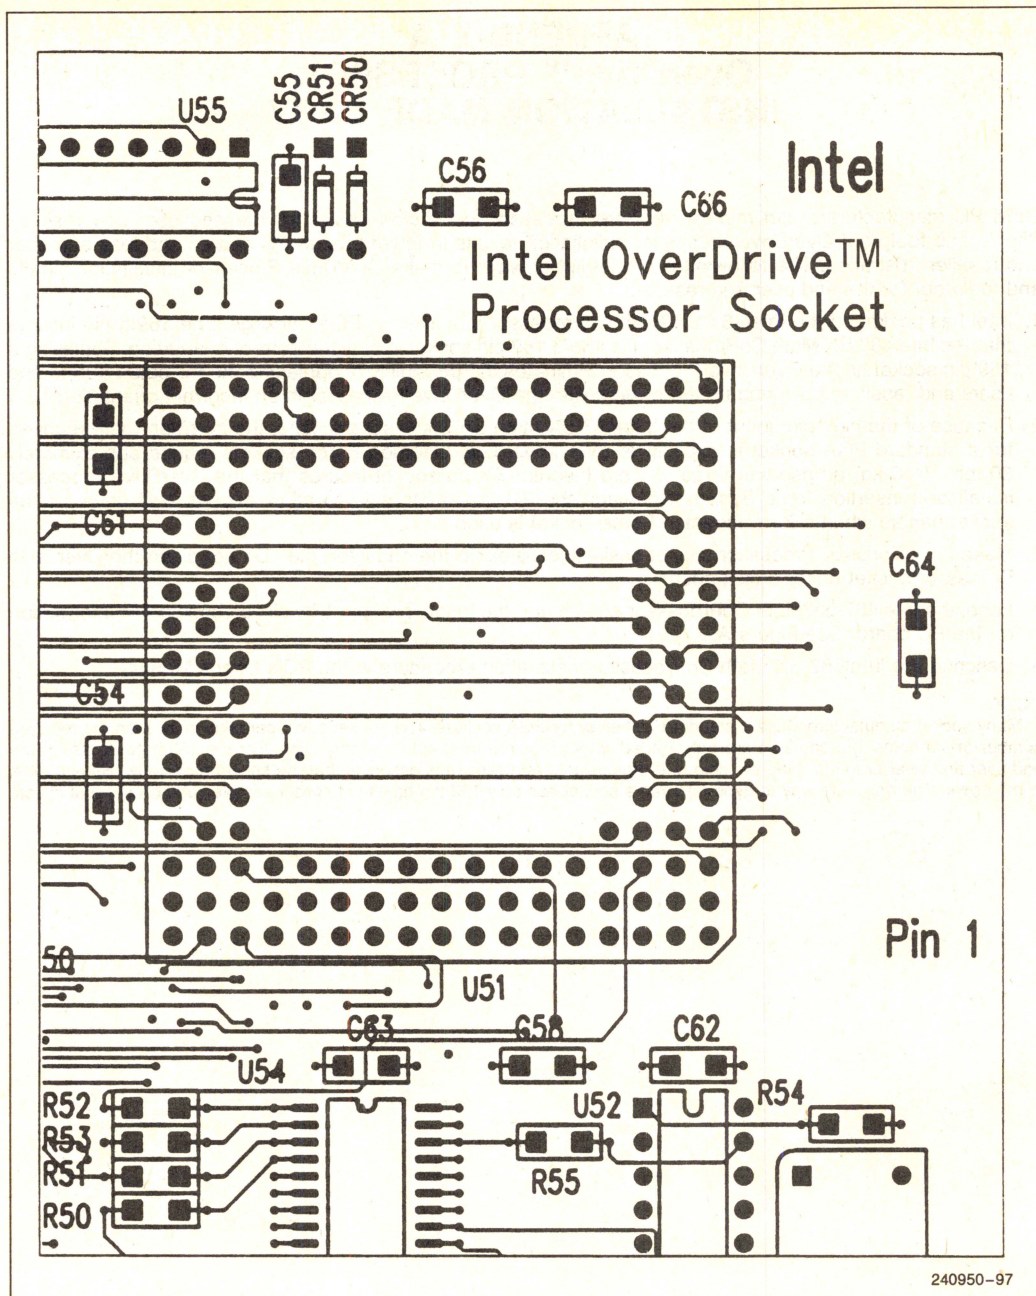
Figure A. Example of PC Board with "Intel OverDrive™ Processor Socket" and "Pin 1" Silk Screened onto PC Board
